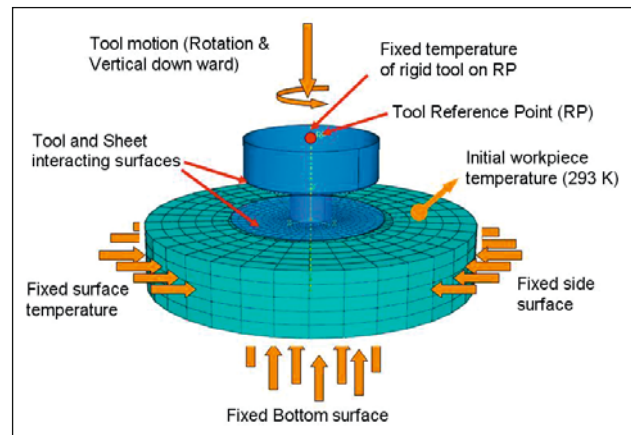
Model assembly; rigid tool and workpiece along with the initial and boundary conditions
